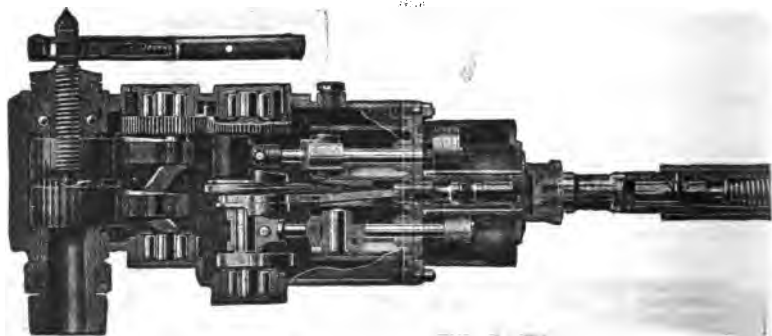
,964.—Thor close quarter double acting piston air drill, with piston valves. *In construction and operation:* There are two double acting cylinders, with valves located between the cylinders. Air is taken in centrally between the cylinders and there is as little clearance as possible. Geared to the crank shaft is another two throw crank diametrically opposed. This crank operates directly on two oscillating levers centered on the drill spindle proper and having the bearings around same. These levers are provided with pawls of practically the whole thickness of the lever. The pawls operate on ratchet teeth sunk in the spindle, the outer circumference, or point of teeth leaving ample slack for bearings of the levers. The motion of the drill spindle is continuous. The engine cranks are at an angle of  $135^{\circ}$  which allows the two pistons to pull together when the position of the levers requires the greatest power. The drill has a reversible ratchet feed and a poppet shuttle controls the speed and power.
